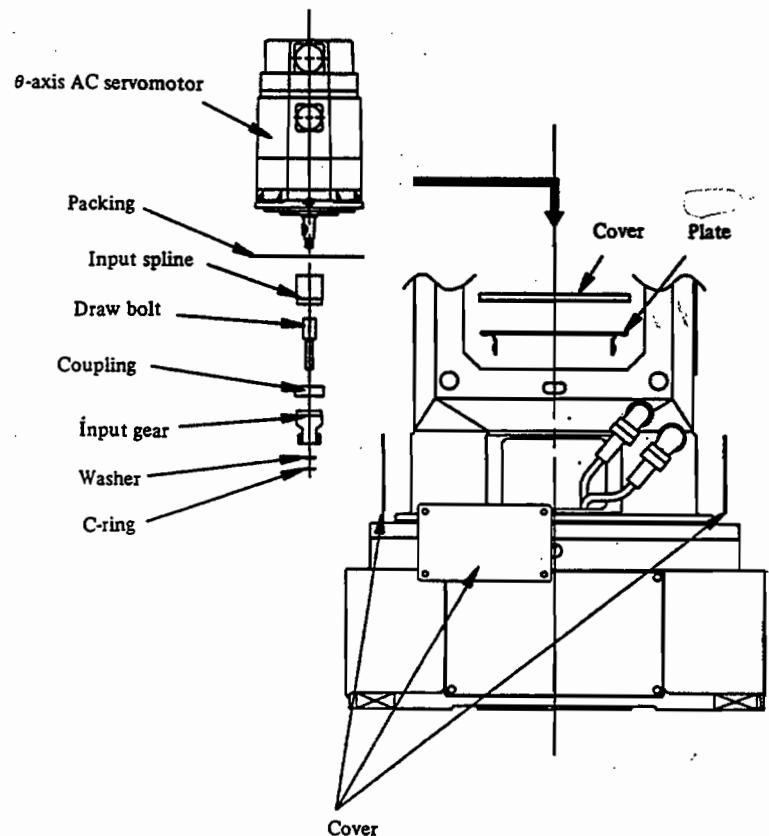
(a) Replacing θ -axis motor (S-700)
